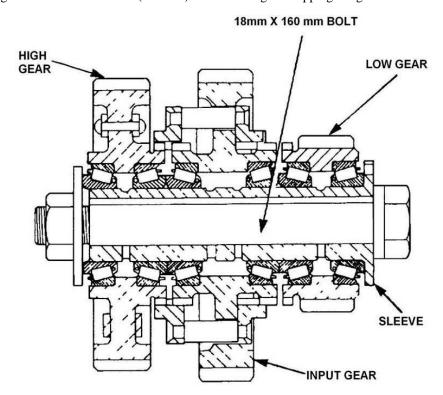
Intermediate Gear Assembly Pre-load Adjustment - Sectional View
